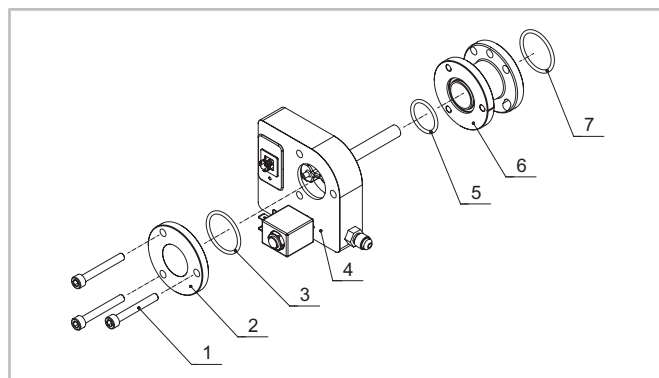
Mounting of OLM-IQ-AS that replaces a sight glass with sealing flange
